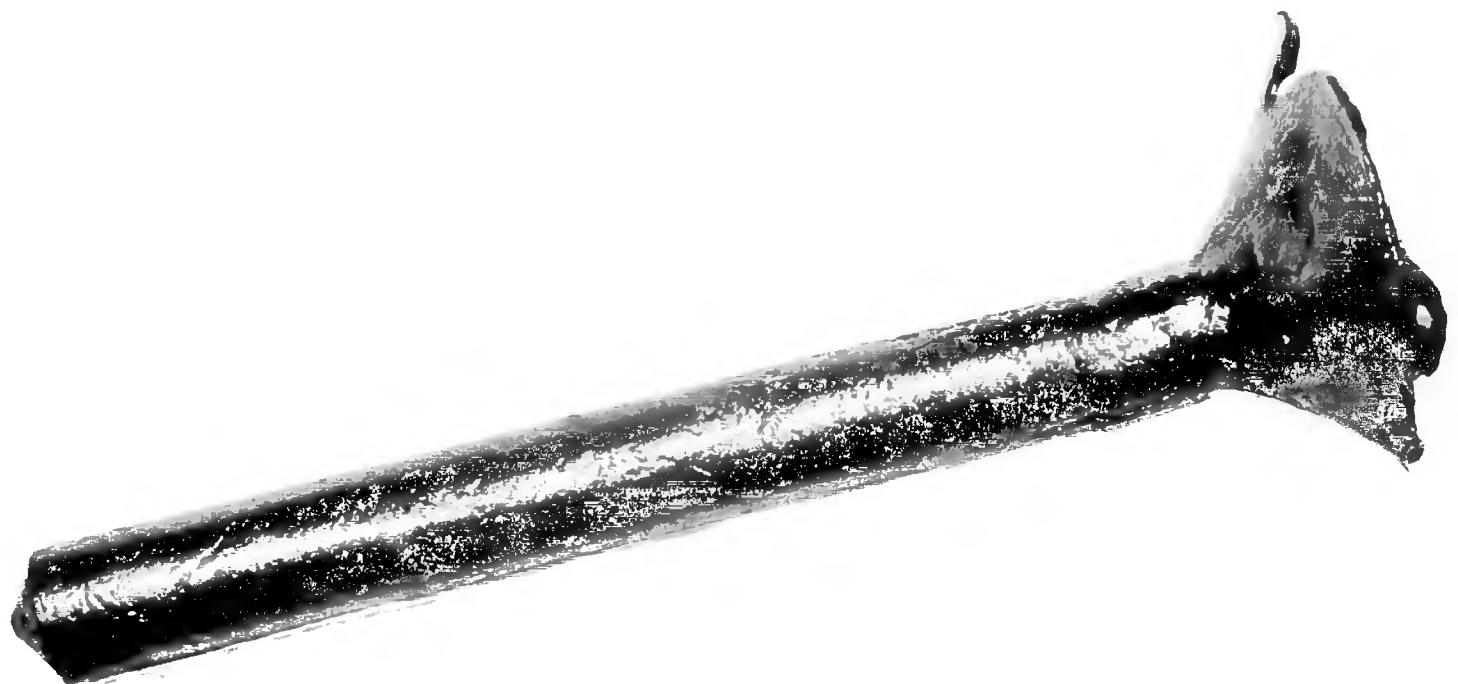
Skull Casting Representative of Castings Made Using the Coil to Control Arc Deflection.
